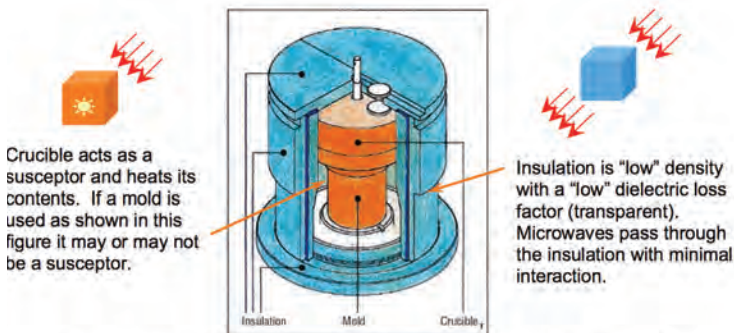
Insulation, Crucible and Mold Stack-Up (Adapted from Reference 2)
